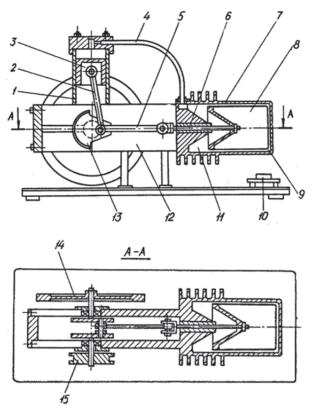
The Stirling Engine of UDS-1 model: 1 – power cylinder, 2 – connecting rod, 3 – power piston, 4 – tube of the internal contour, 5 – connecting rod, 6 – hob, 7 – cylinder, 8 – displacer piston, 9 – hot space, 10 – place for external supply of heat, 11 – cold space, 12 – body, 13 – crank, 14 – flywheel, 15 – pulley
